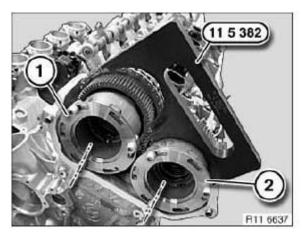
Identifying Exhaust VANOS Gear And Special Tool 11 5 382 Courtesy of BMW OF NORTH AMERICA, INC.
